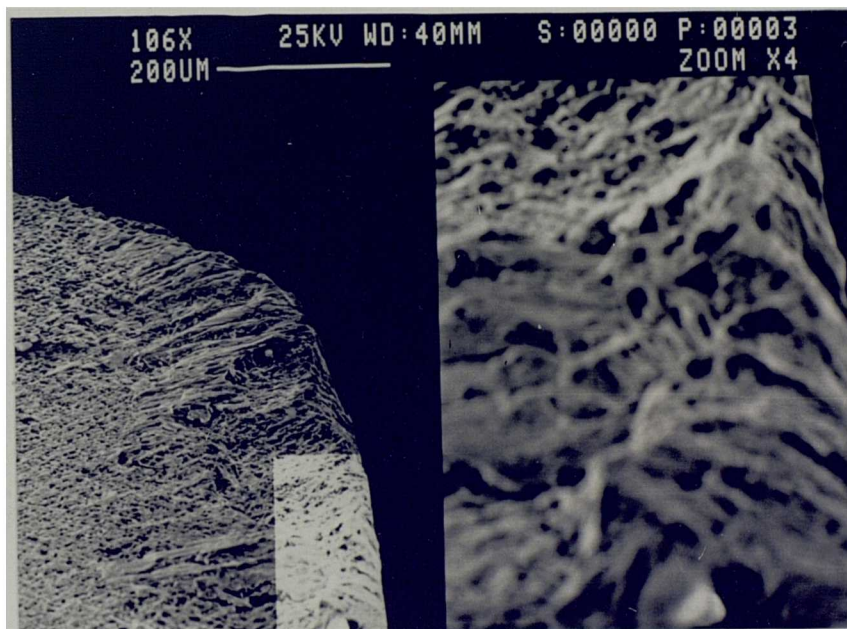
Penetration of cracks from brazed WC material into the PCD layer.
